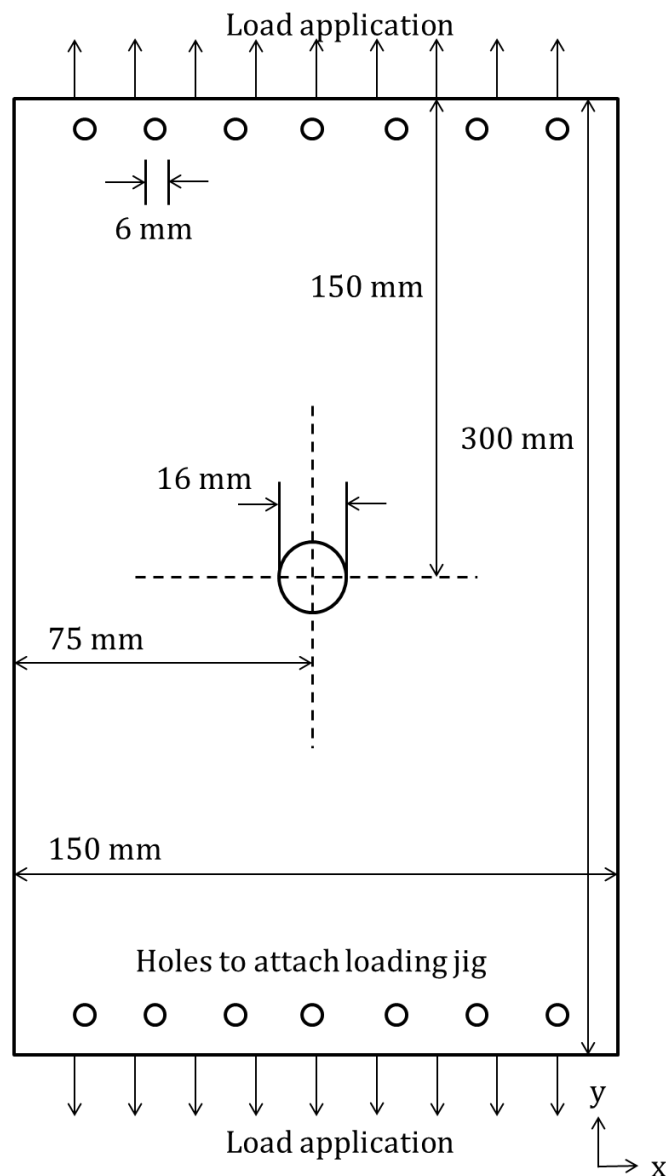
Drawing of the hole-in-plate specimen [15] (specimen thickness is 10mm).
